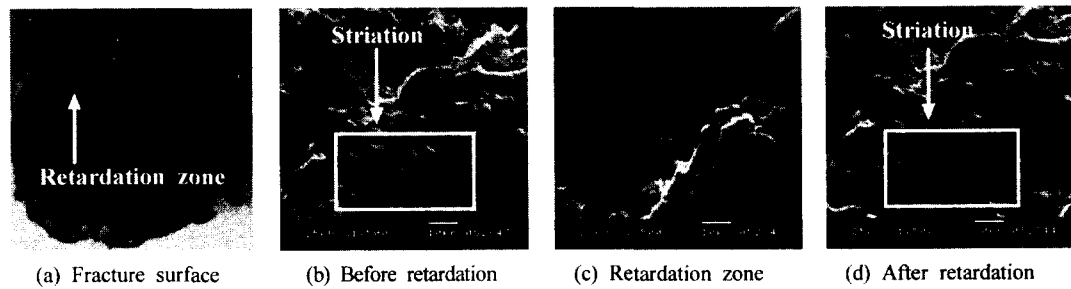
Fracture surface and fractography of the retardation process
